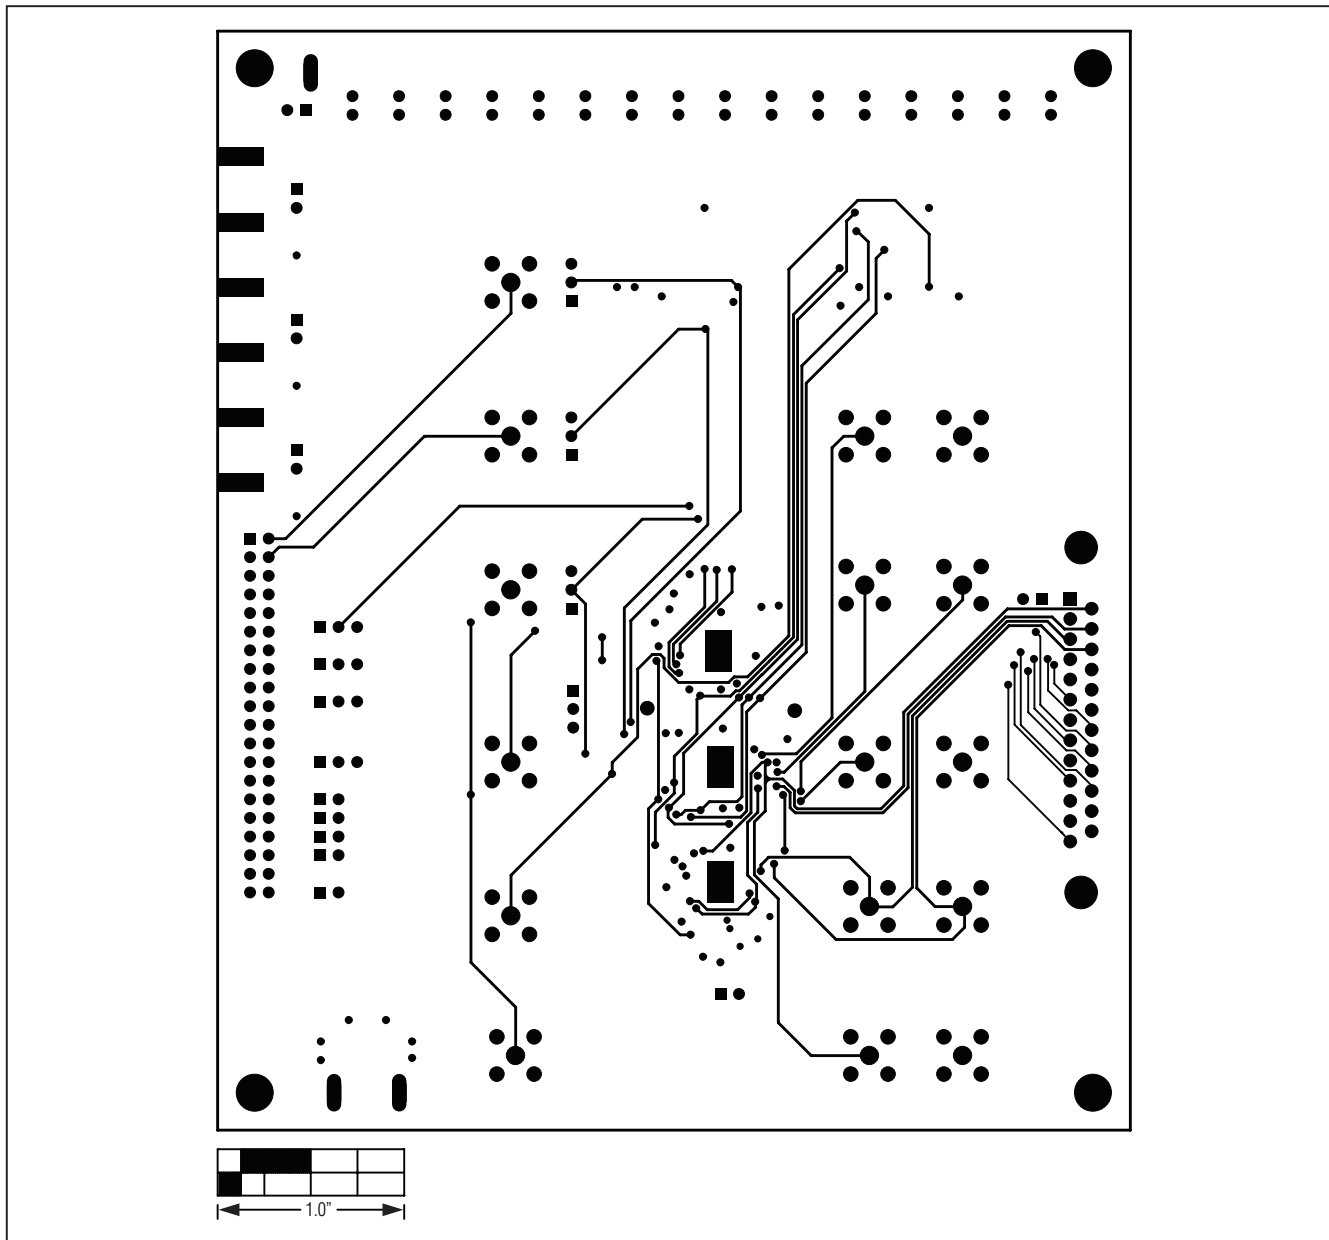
MAX13171E/MAX13173E/MAX13175E EV Kit PCB Layout—Solder Side
